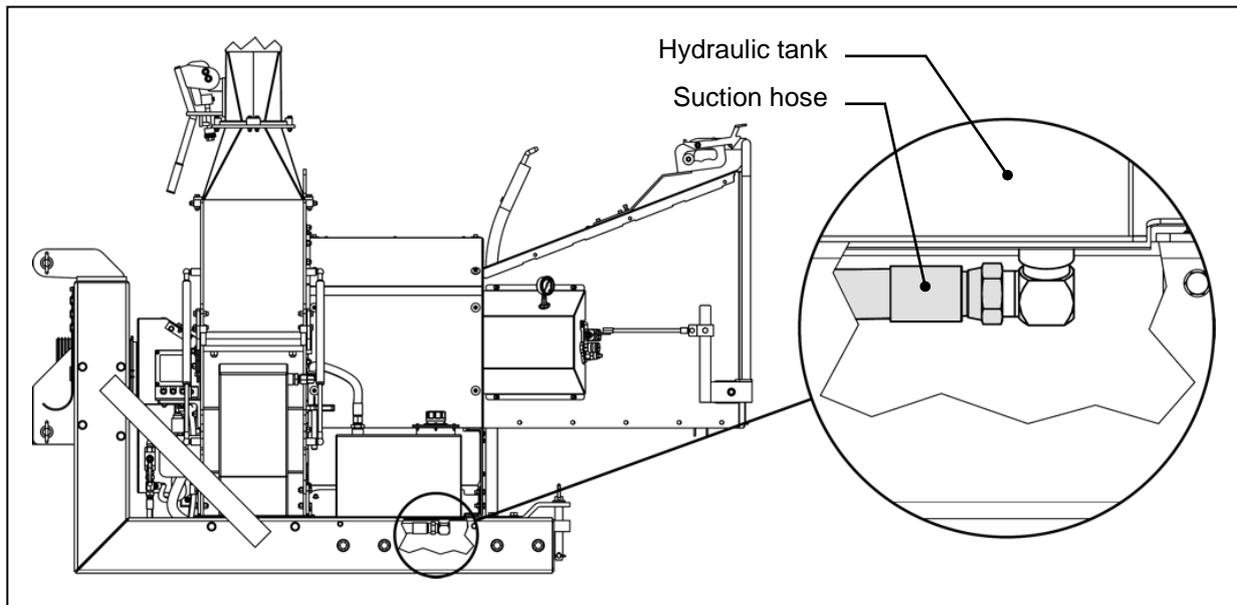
Attaching the suction hose to the bottom of the hydraulic tank
